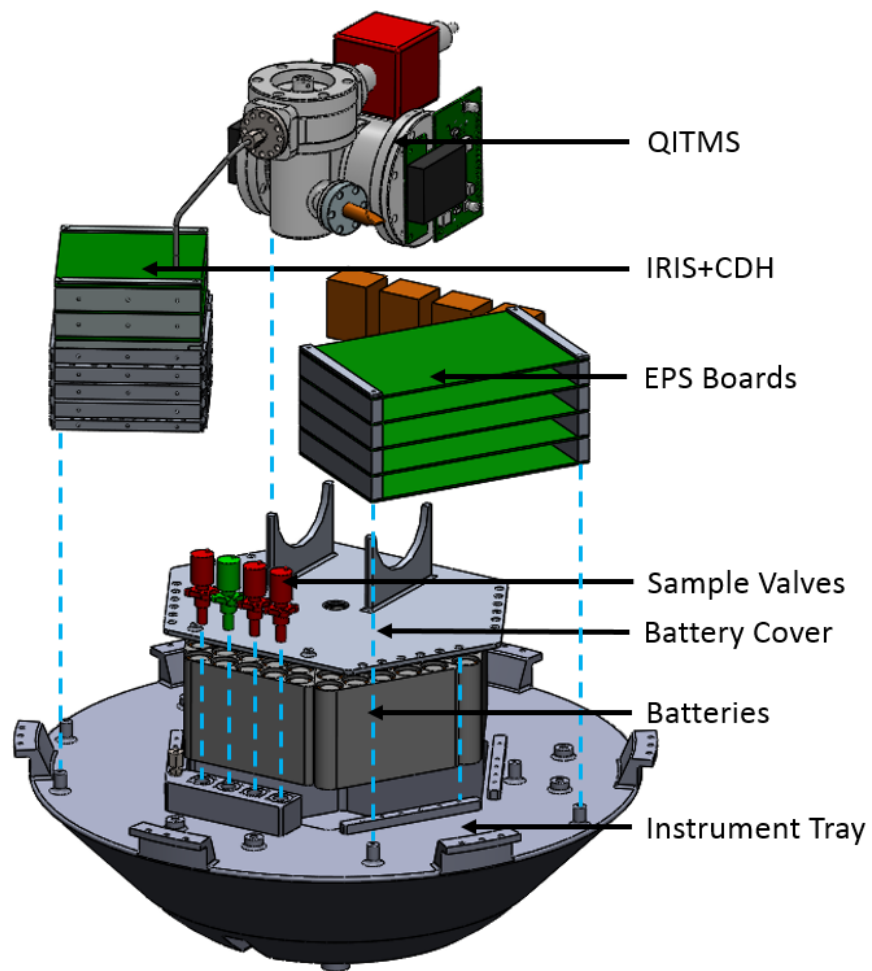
Z-axis exploded view of instrument tray components, dotted lines show connection locations.
